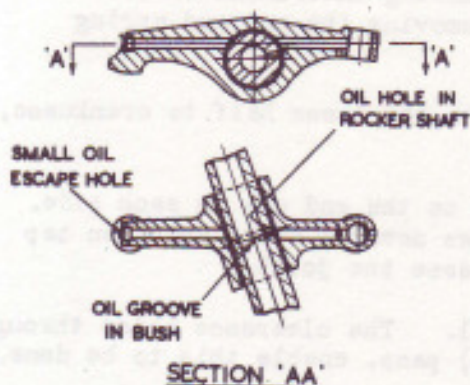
OILWAYS IN ROCKER SHAFT AND ROCKER ARM.
